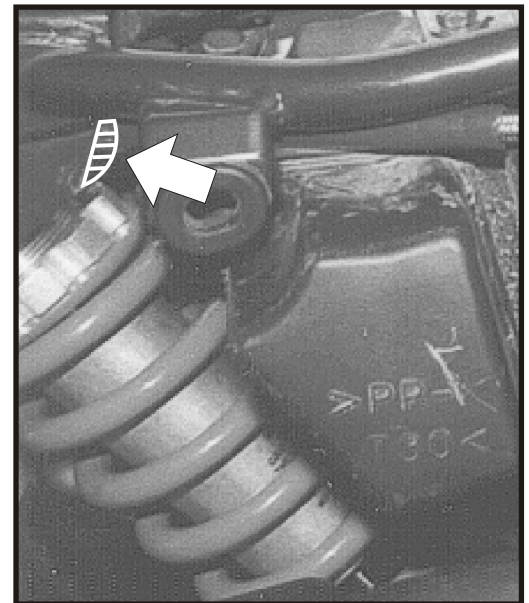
Arrow indicates portion of gusset that must be removed to give adequate clearance to the hose.
